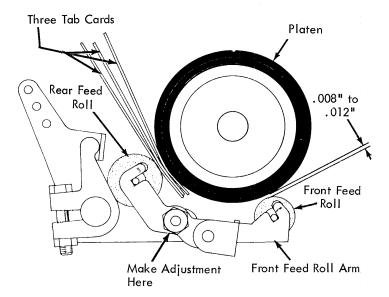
Feed Roll Adjusting Eccentrics (Early)
